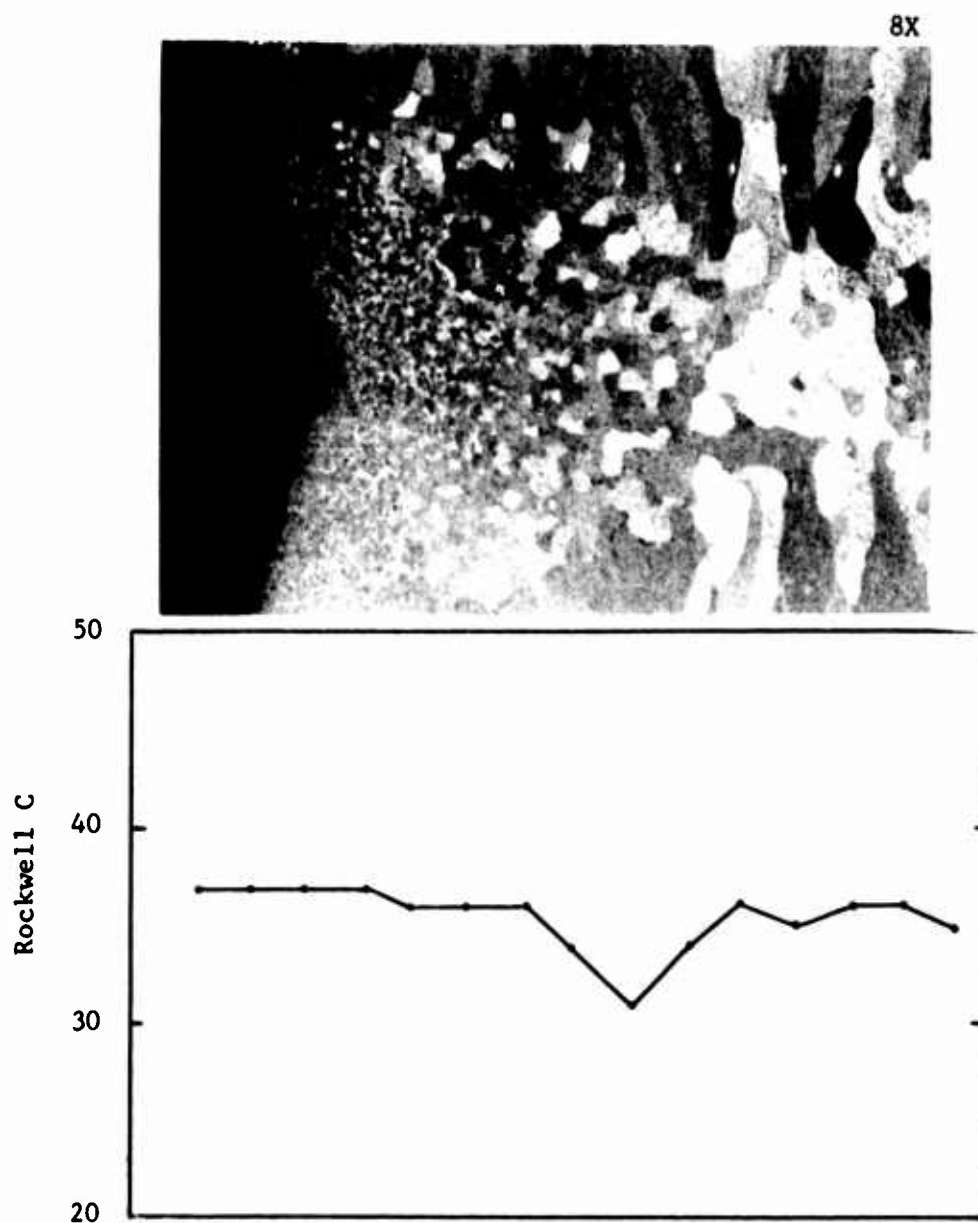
MACROSTRUCTURE AND HARDNESS MEASUREMENTS IN AN AUTOMATIC GTA WELD USING T1-662 FILLER METAL, HEAT TREATED AT 1400F - 4 HRS
